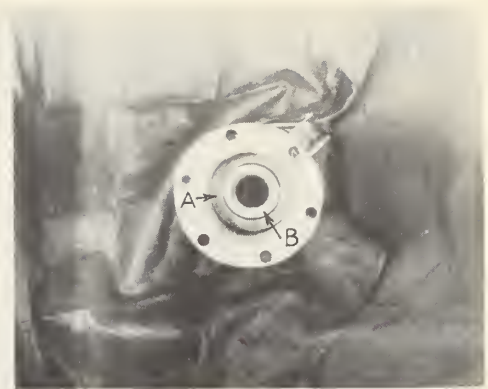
Model A Ford drive-shaft grease retainer. A, The 1/2-inch plate welded in place. B, National grease retainer no. 50045.
